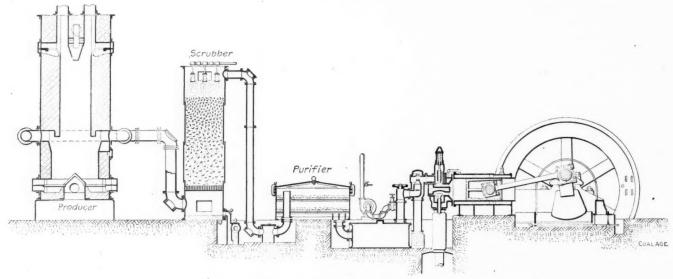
SHOWING SECTIONAL VIEW OF DOUBLE-ZONE SUCTION TYPE OF PRODUCER
